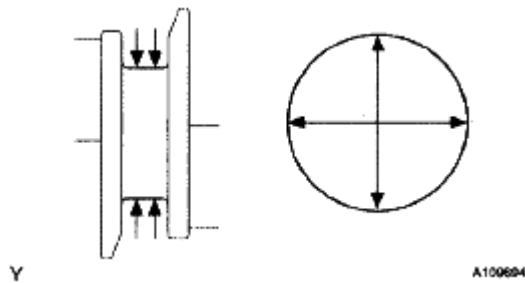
Checking Main Journal For Taper And Out-Of Round
